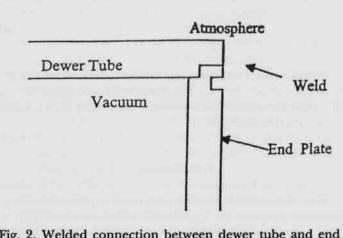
Welded connection between dewer tube and end plate showing improper weld location.
